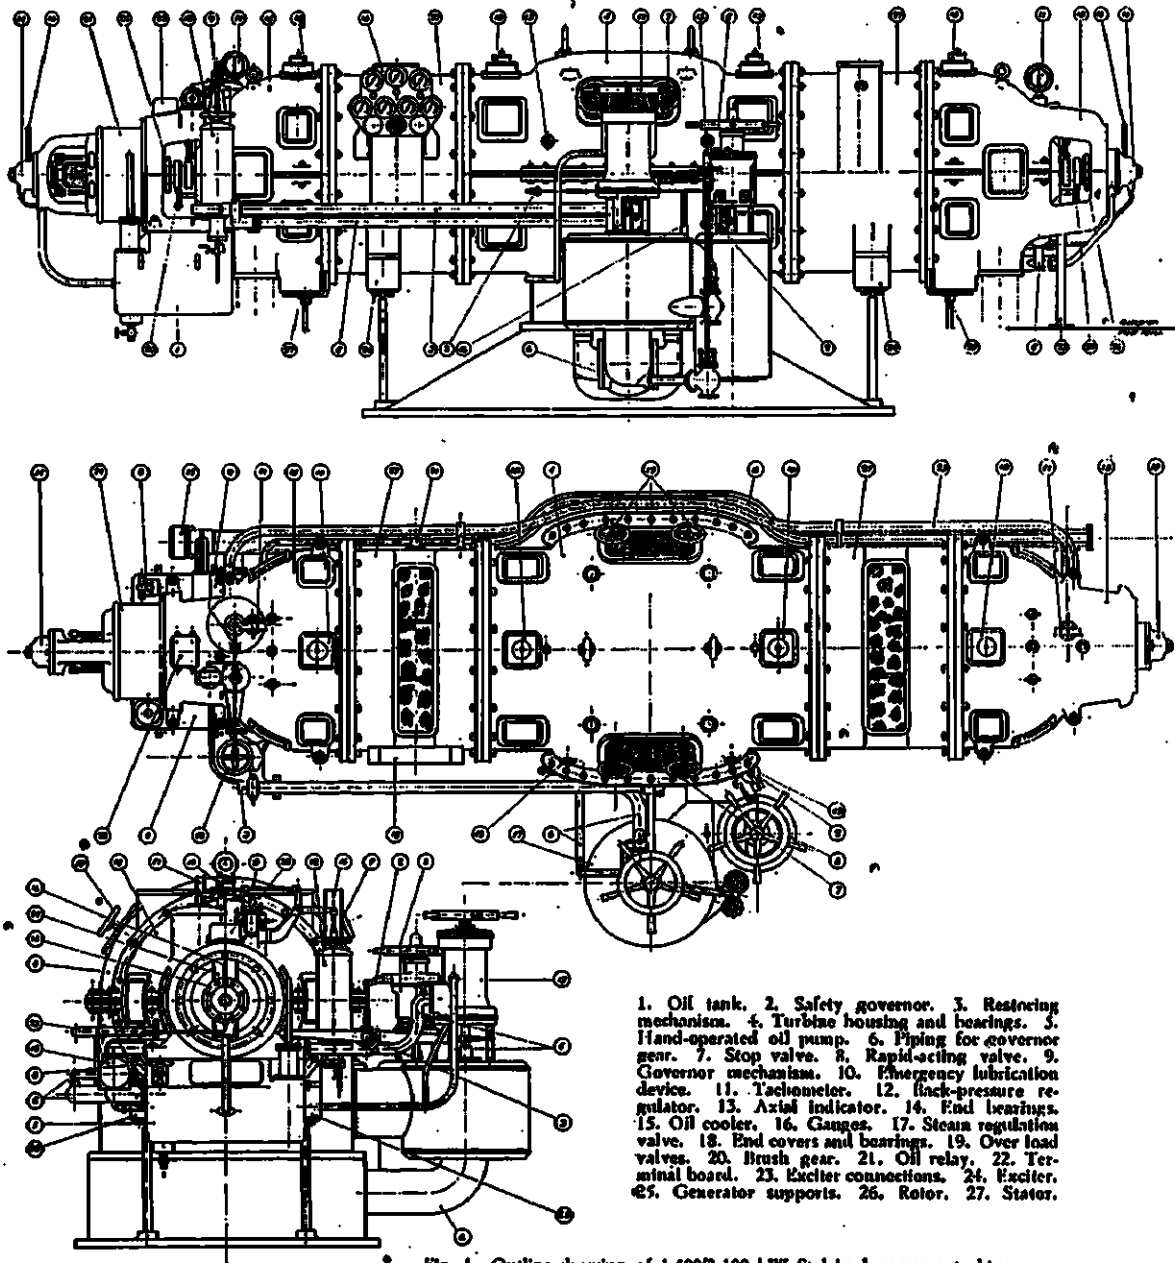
Outline drawing of 1,500/2,100 kW Stal back-pressure turbine.
